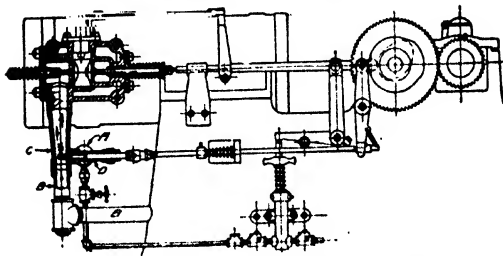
Details of Fuel Injector, Charter Gasoline Engine
